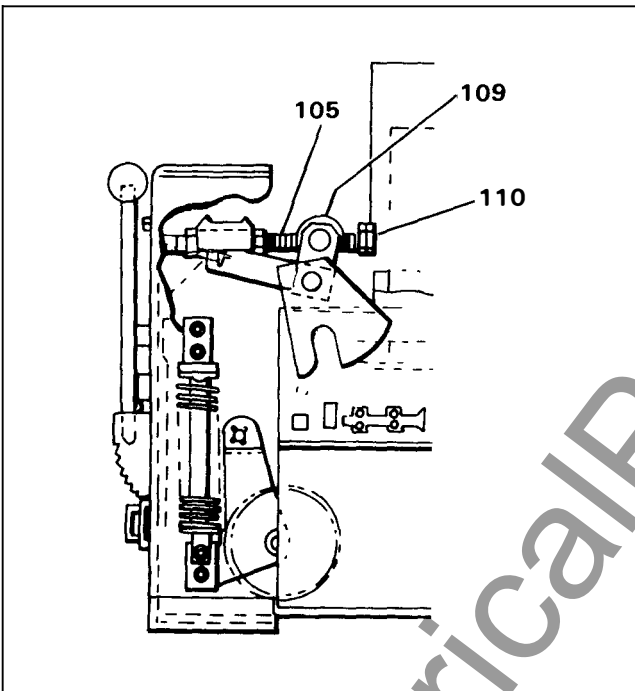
Detail of Typical Racking Mechanism and Drawout Interlock
